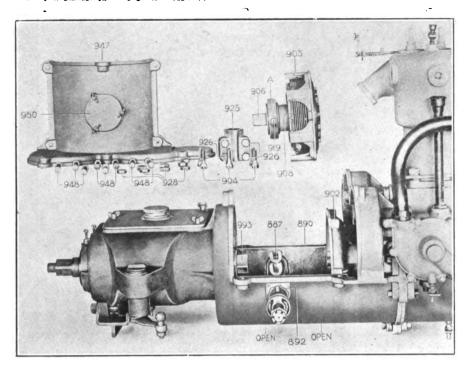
HOW THE CLUTCH IS REMOVED FROM ITS CASE
